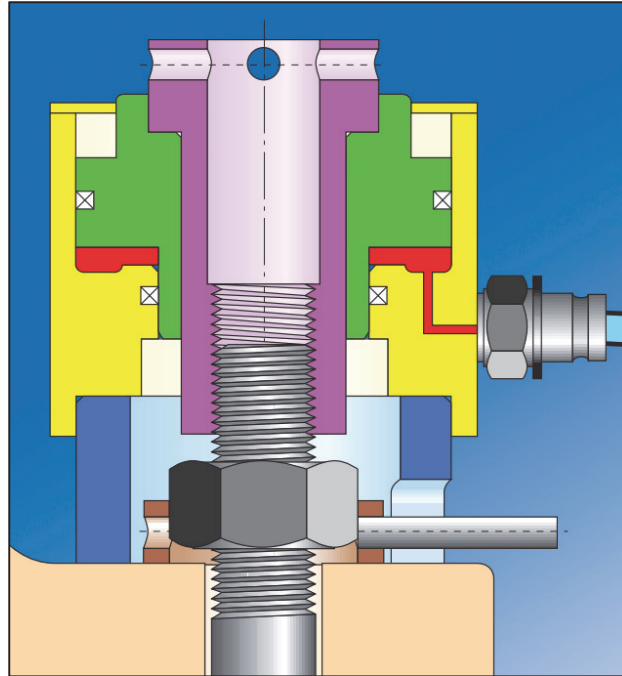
Hydraulic bolt tensioner (SKF, 2001)
